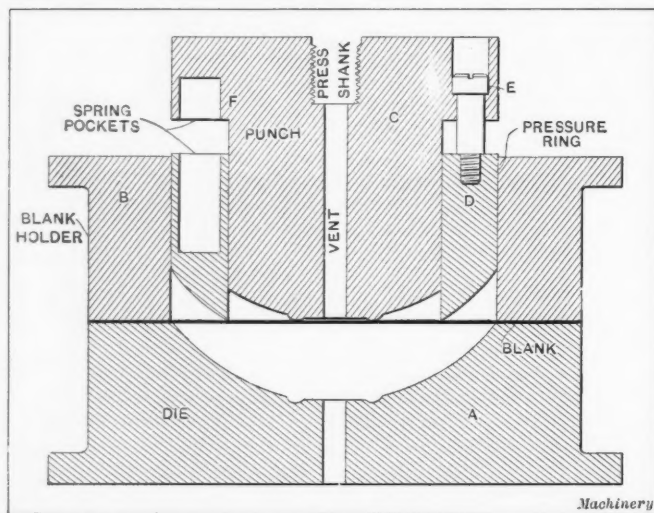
Cover Blank Gripped by Blank-holder preparatory to the Drawing Operation
